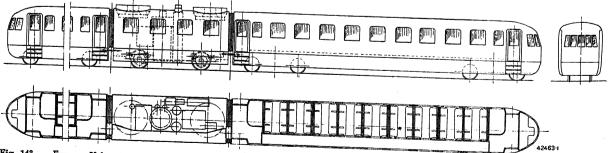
Express Velox train driven by Velox motor coach with individual axle drive through high-speed steam engines of Buchli type.
